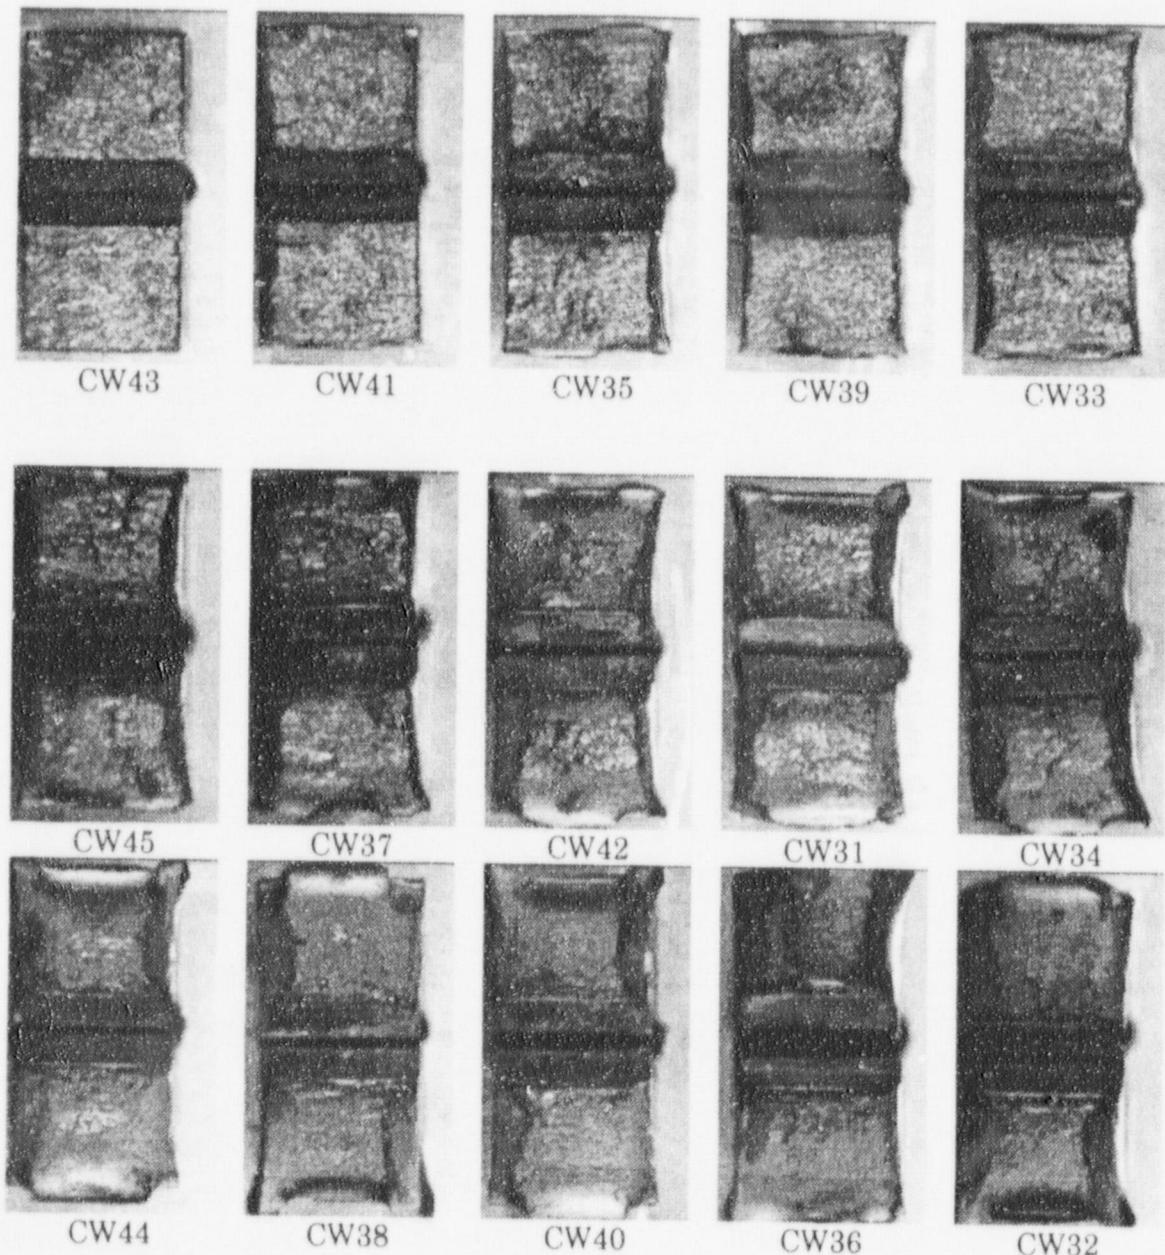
Charpy Impact Specimen Fracture Surfaces for V.C. Summer Unit 1 Reactor Vessel Weld Metal
